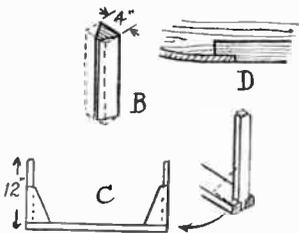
Details of the stem post and frames and the method of letting in the ply bow pieces
